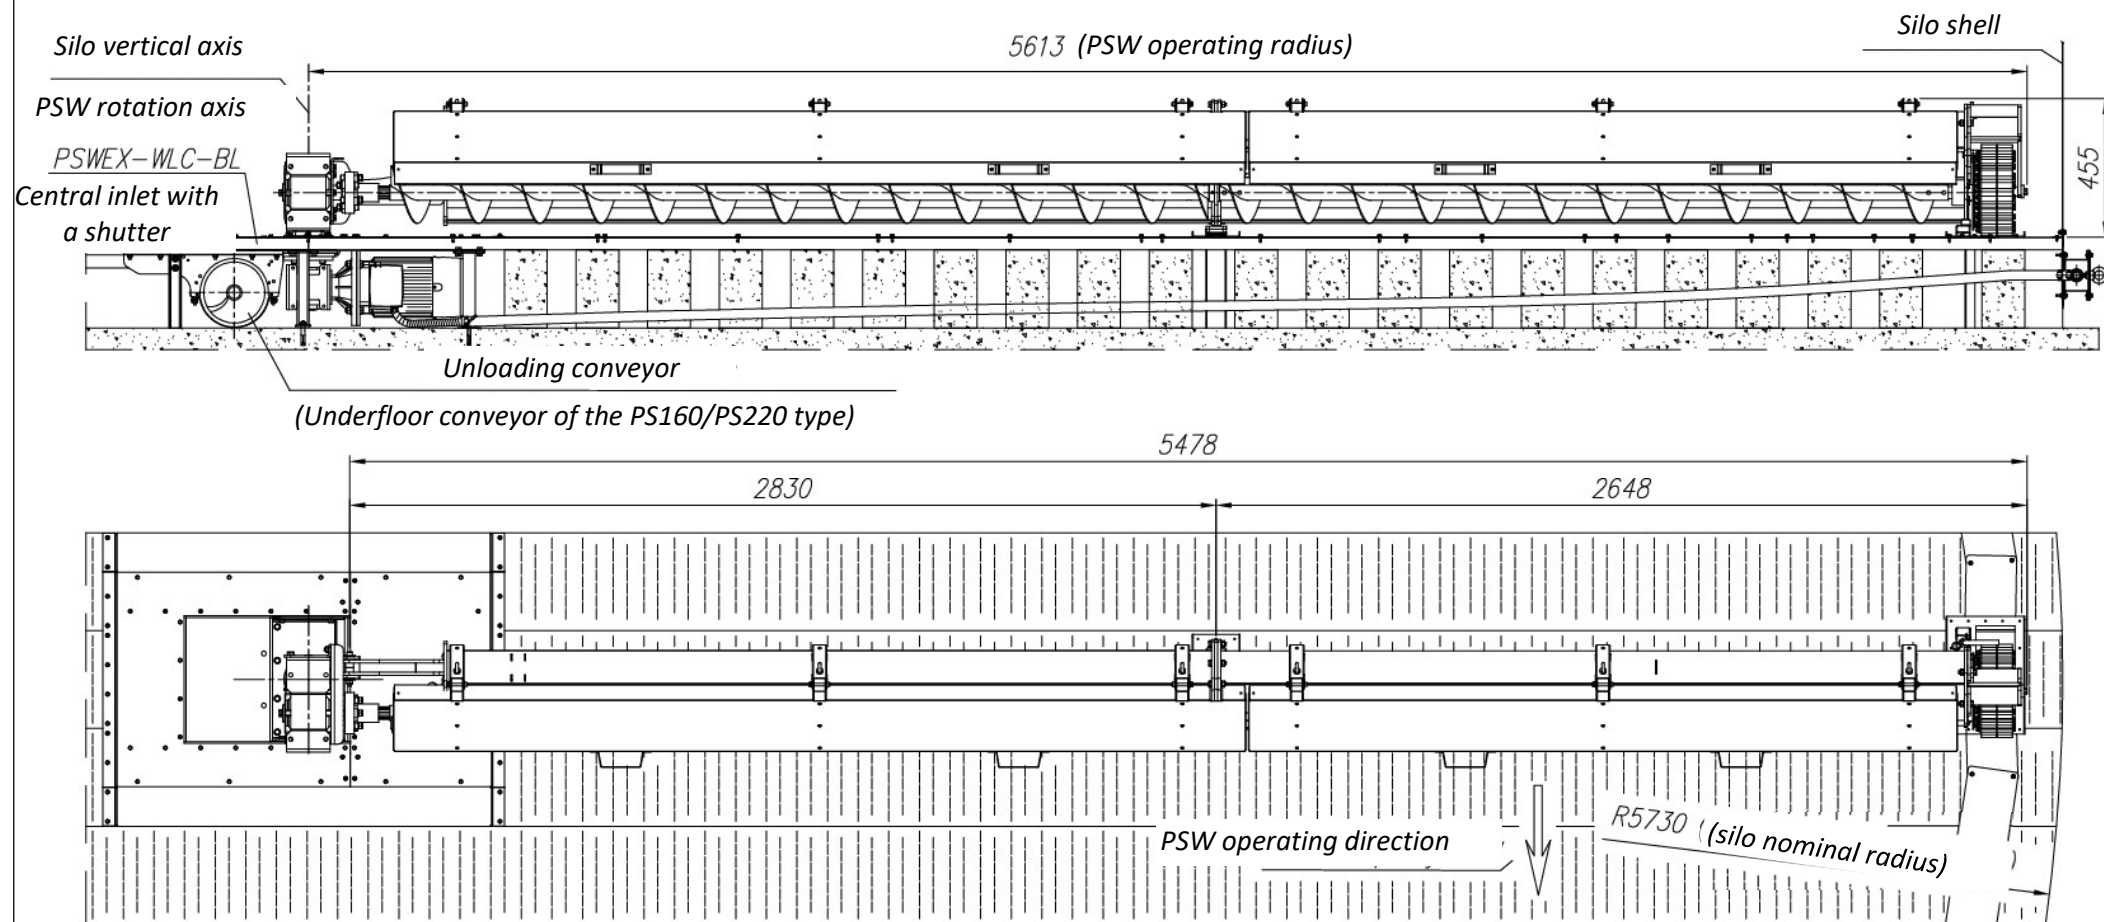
Basic installation dimensions of the internal screw conveyor, of the PSWEX-11 type (dimensions as mm).
